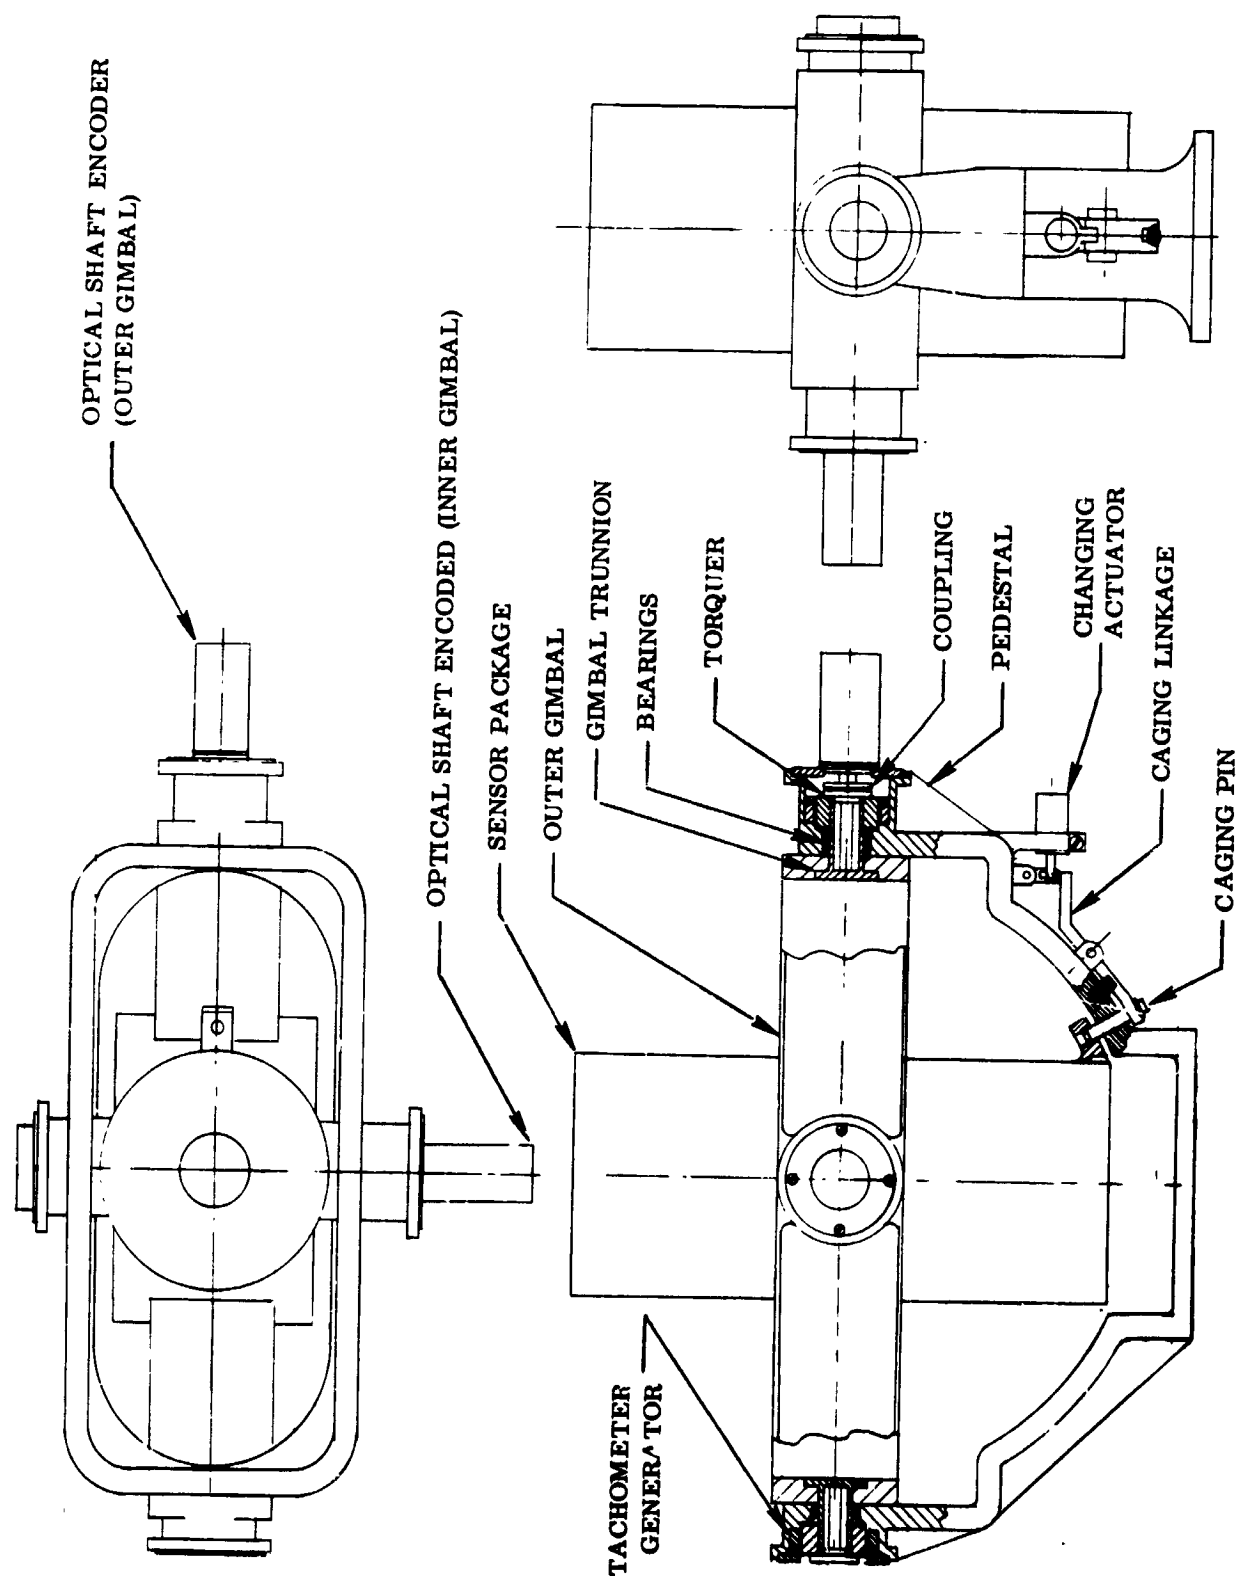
Sensor Package Mounted on OGS Gimbal
